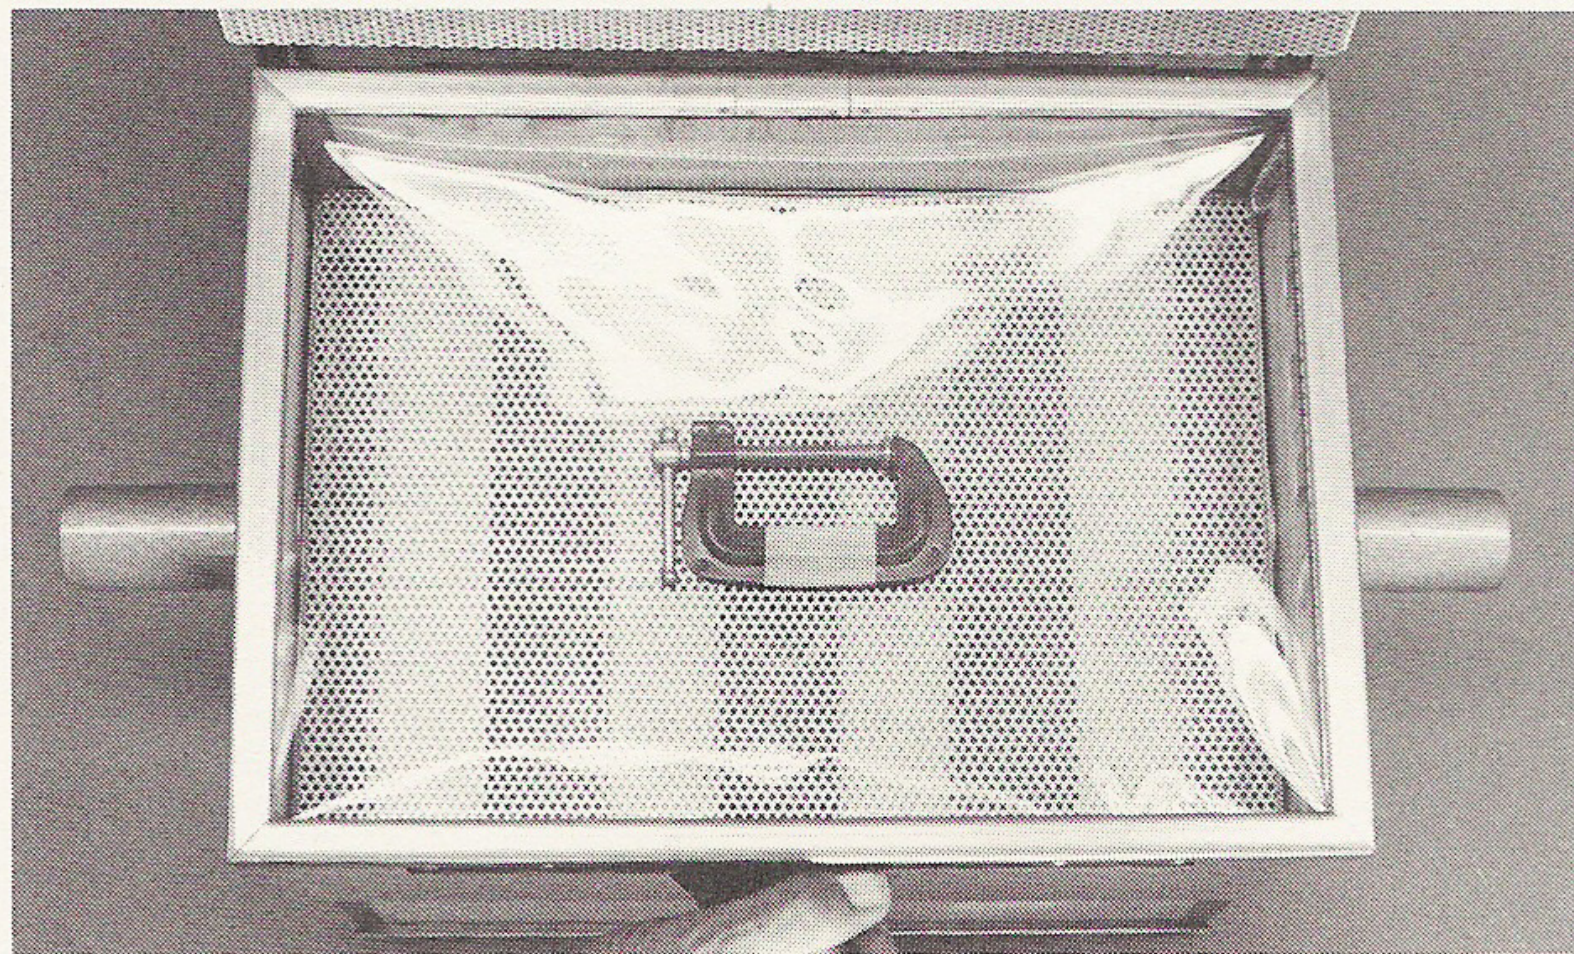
A heated cellulose acetate sheet is ready to be drawn tightly around a C-clamp by the vacuum on this laboratory vacuum former.
